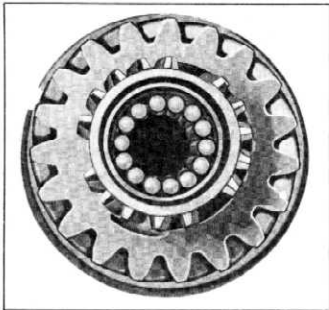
Mainshaft Pilot Roller Bearings in Clutch Gear
